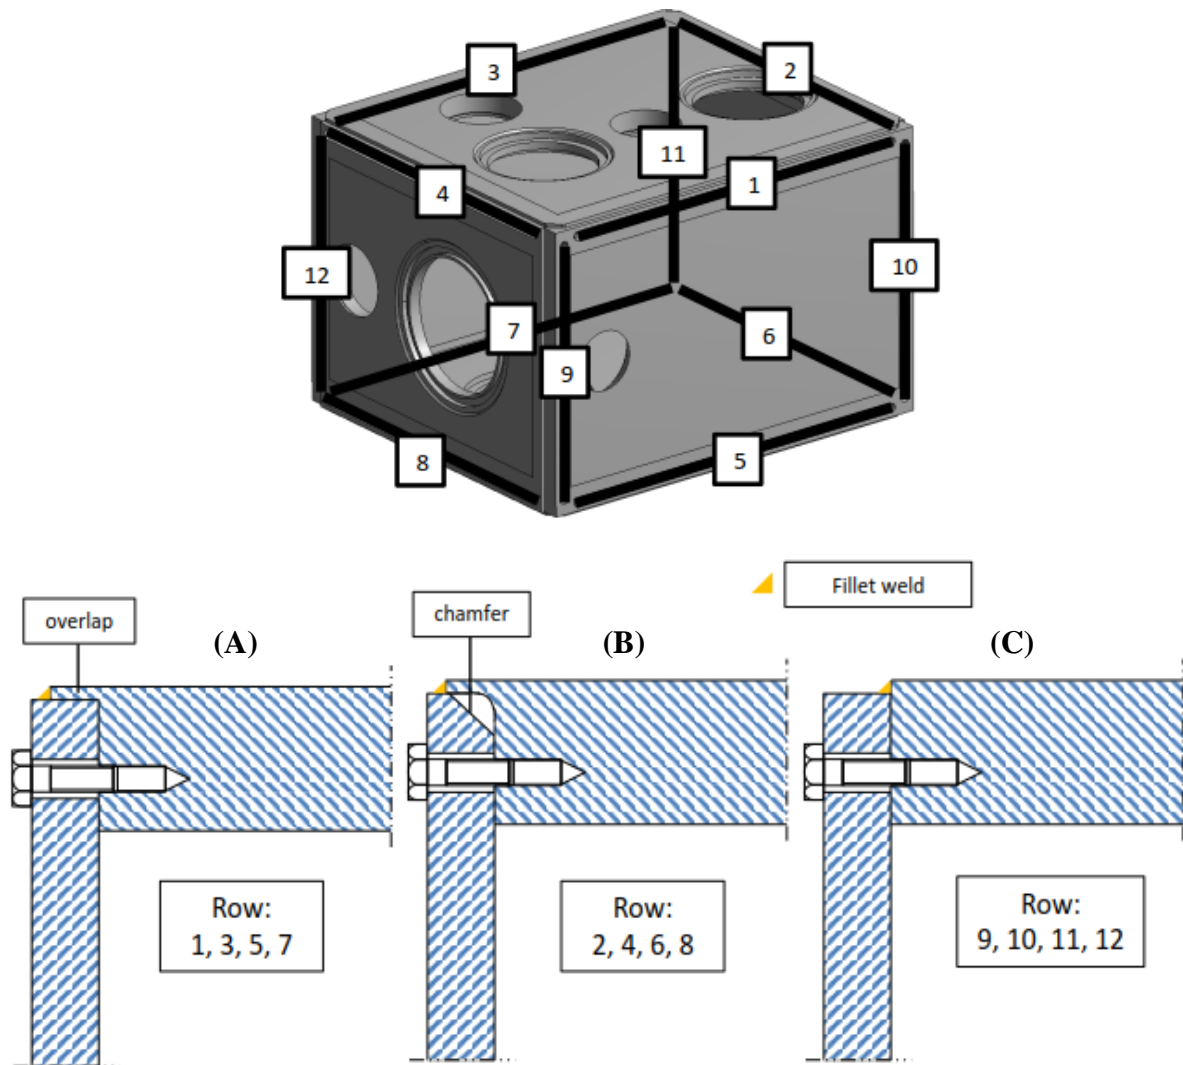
The three joint concepts on the He-vessel, with fillet welds for leak-tightness [14]
